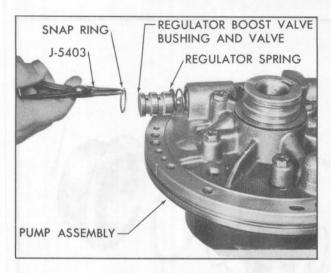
Removing Pressure Regulator Valve Snap Ring
